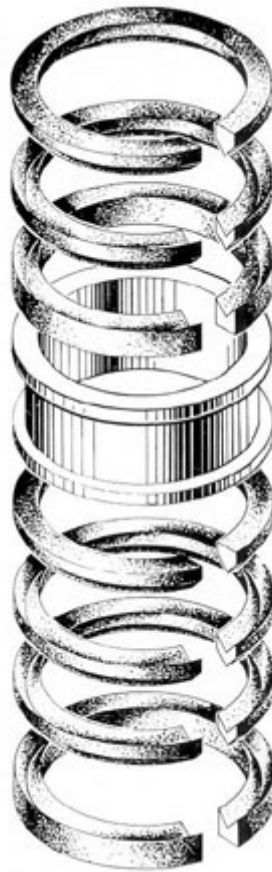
Exploded view of chevron packing for steering system main ram.
